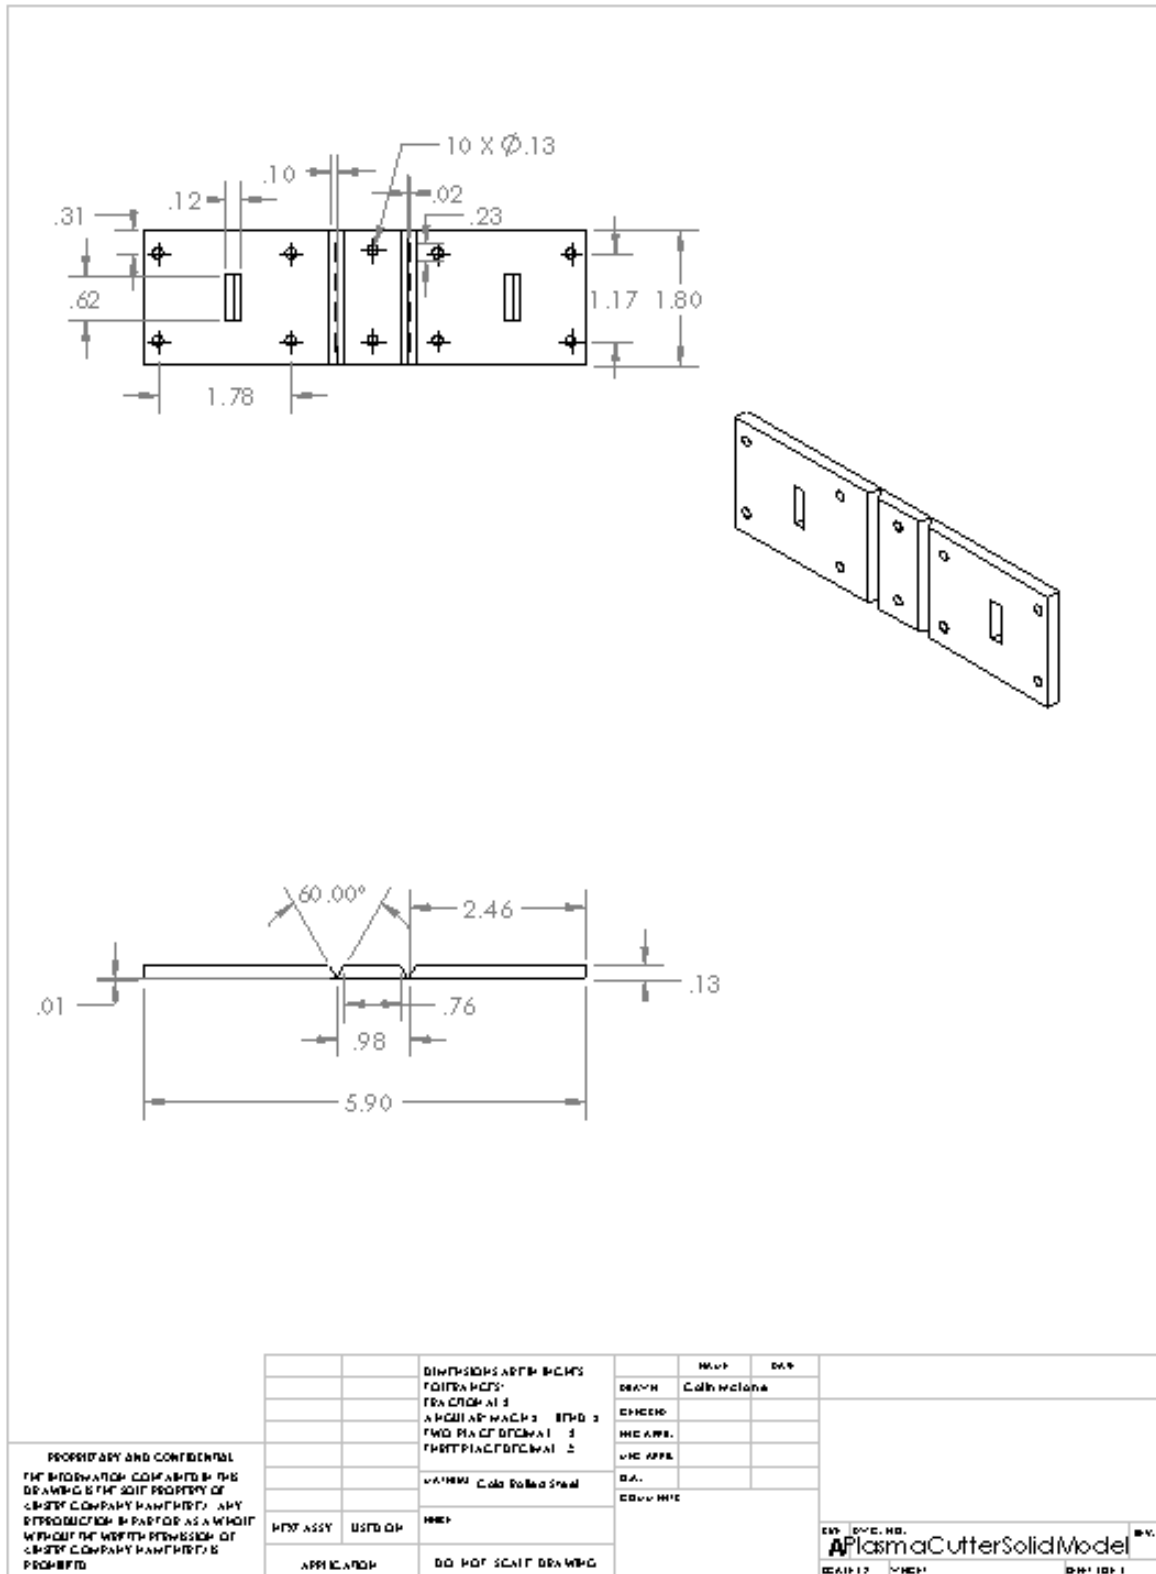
Dimensioned Drawing of Angled Section of New Design
